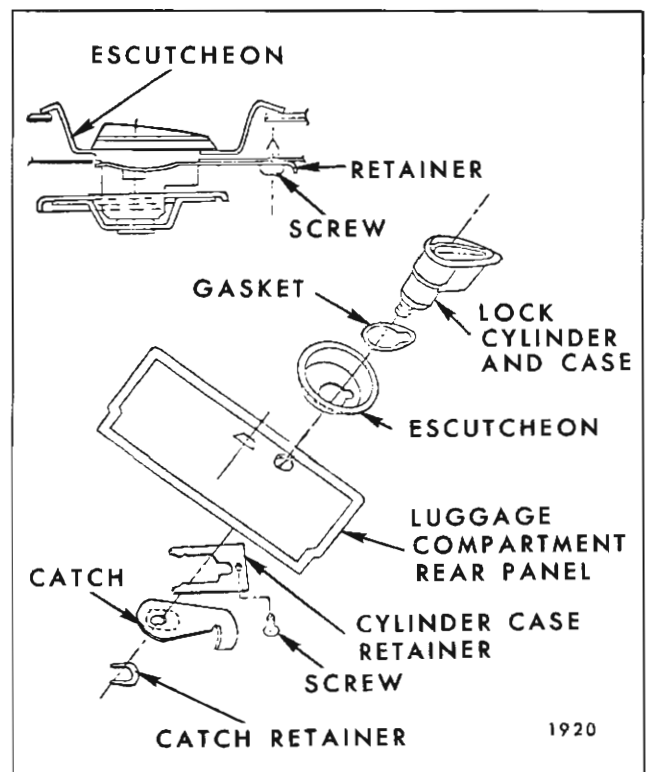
H41—Luggage Compartment Lock 15000 and 16000 Series
